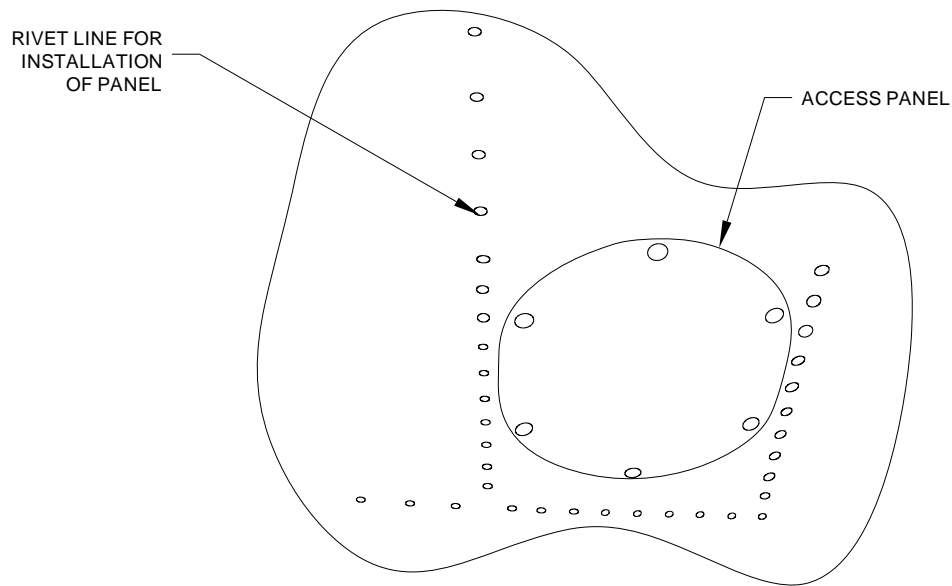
Rivet Line Method to Determine Mounting Panel Alignment
